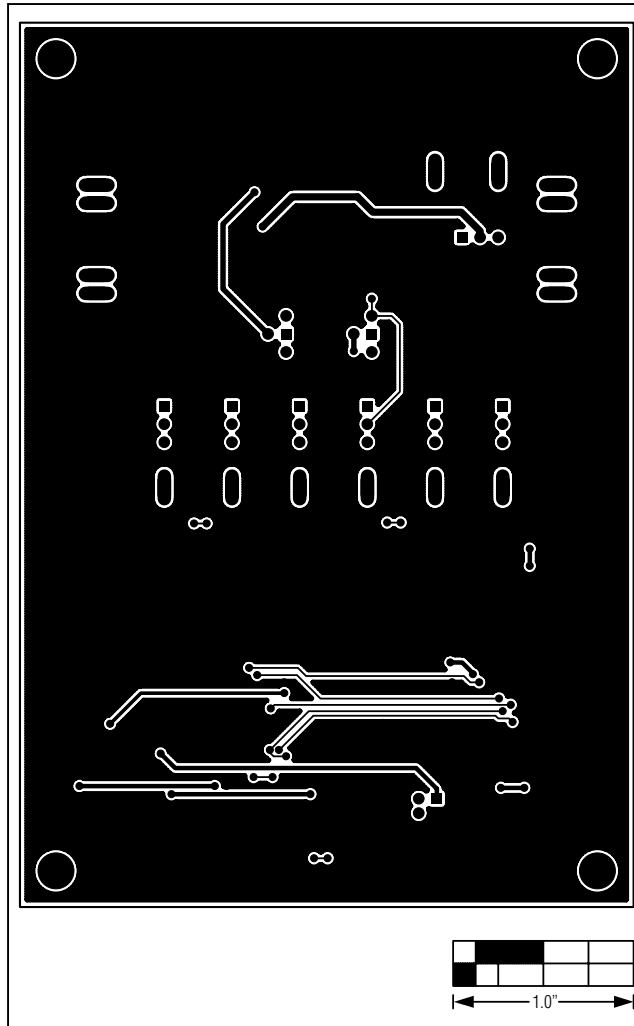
MAX13325 EV Kit PCB Layout—Solder Side
